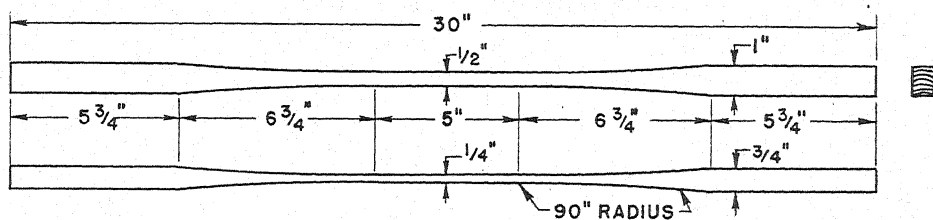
Tension-Parallel-to-the-Grain Specimen.
